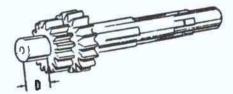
The fourth speed gear and the drive gear are pressed onto the countershaft (layshaft). Distance (D) must be 0.553-0.655 inch (16.58-16.64mm) and clearance between gears should be at least 0.007 inch (0.18mm).
